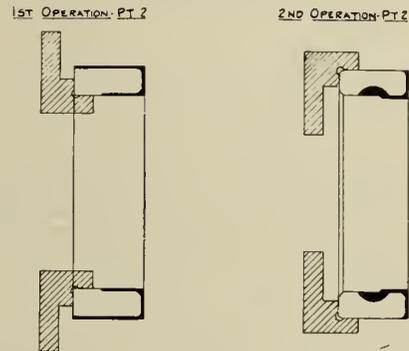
Turret Lathe First and Second Operations for Inner Ring Machining.
